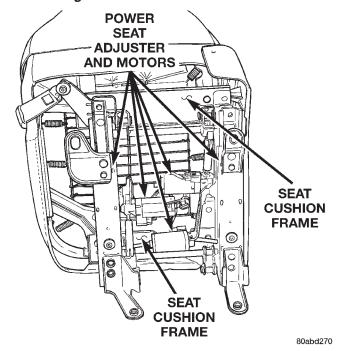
Power Seat Adjuster and Motors Remove/ Install
